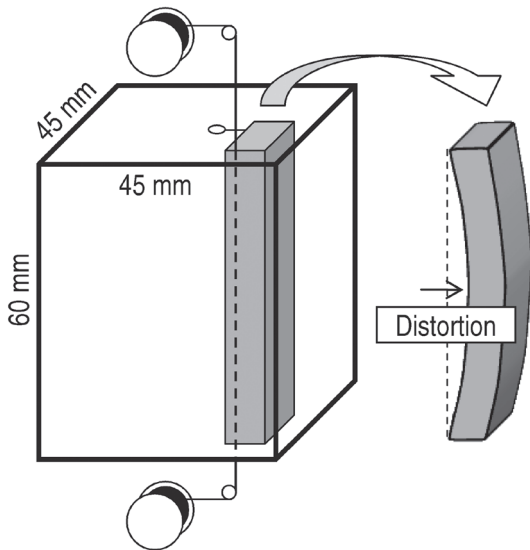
Schematic illustration of test shape at wire electric discharge machining.
